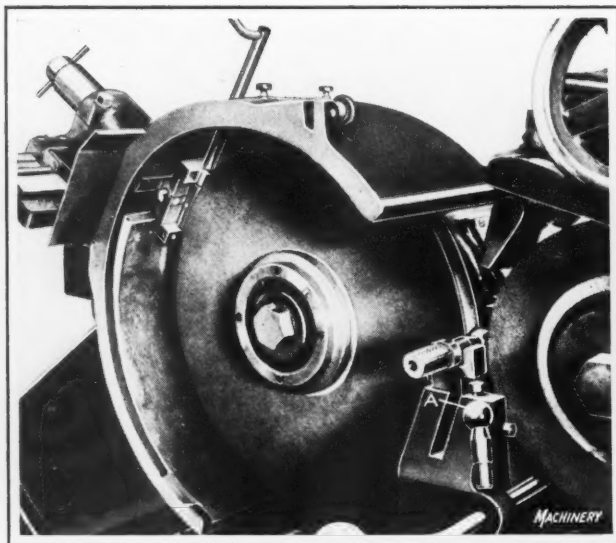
Finishing the Spherical End of Ball Studs on a Cincinnati Centerless Grinding Machine
